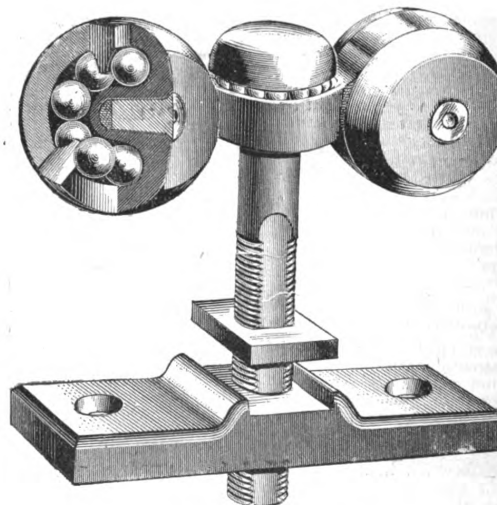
The McCabe Ball Bearing Door Hanger.
